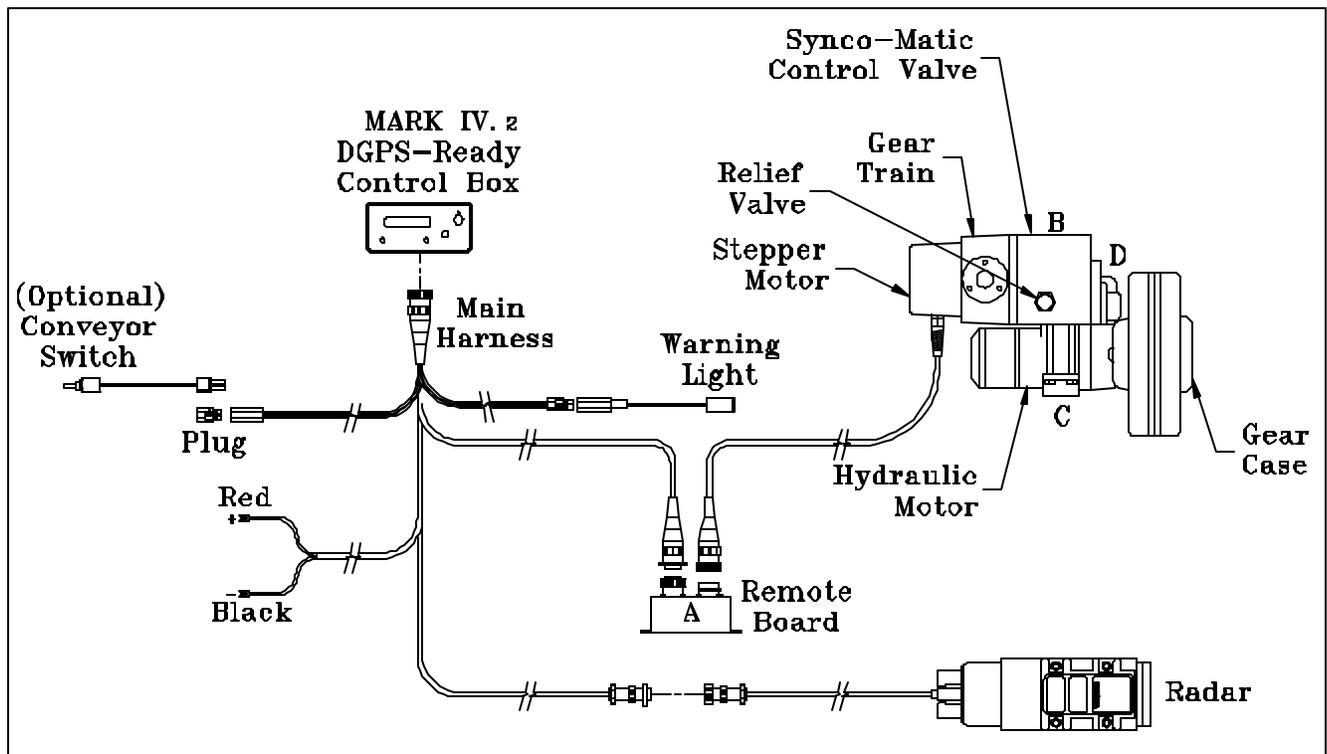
Synco-Matic® Mark IV.2 Assembly
